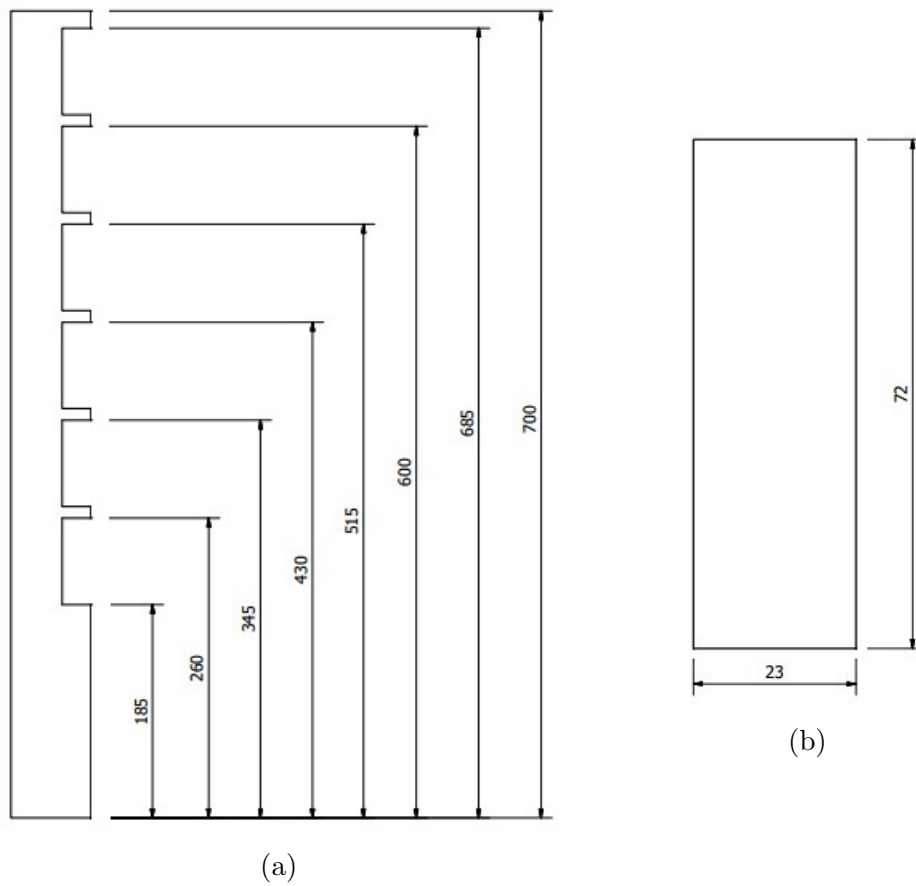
Top view of the (a) wing and (b) aileron with relevant dimensions
